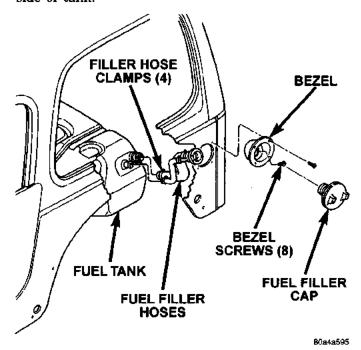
Fuel Filler Hoses/Fuel Fill Cap
